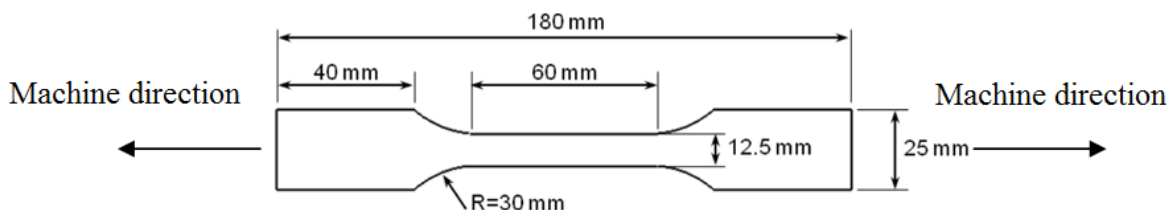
Dimension of dumbbell-shaped specimens used for tensile testing.
